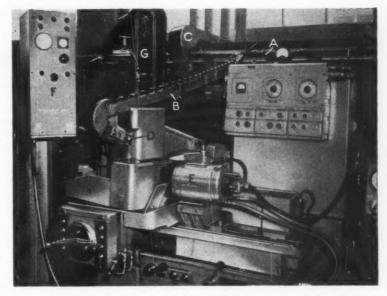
The Bores of Cups are Finish-ground on a Battery of Heald 180 and 190 Centrimatic Machines. This 190 Machine has Federal Automatic Size Control Equipment
